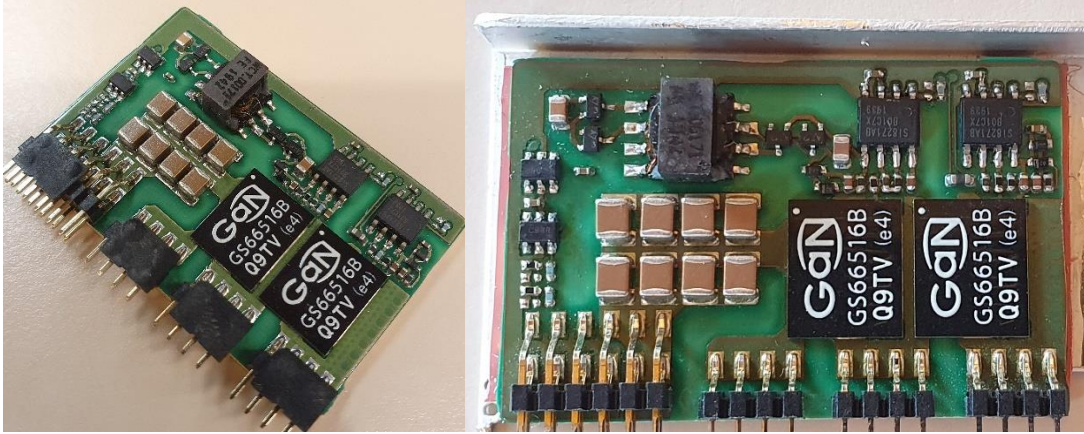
Tested prototype – Insulated metal substrate board with GaN (GS66516B) half-bridge and insulated gate drivers after SMT assembly (left), assembled to the aluminum heatsink (right)
